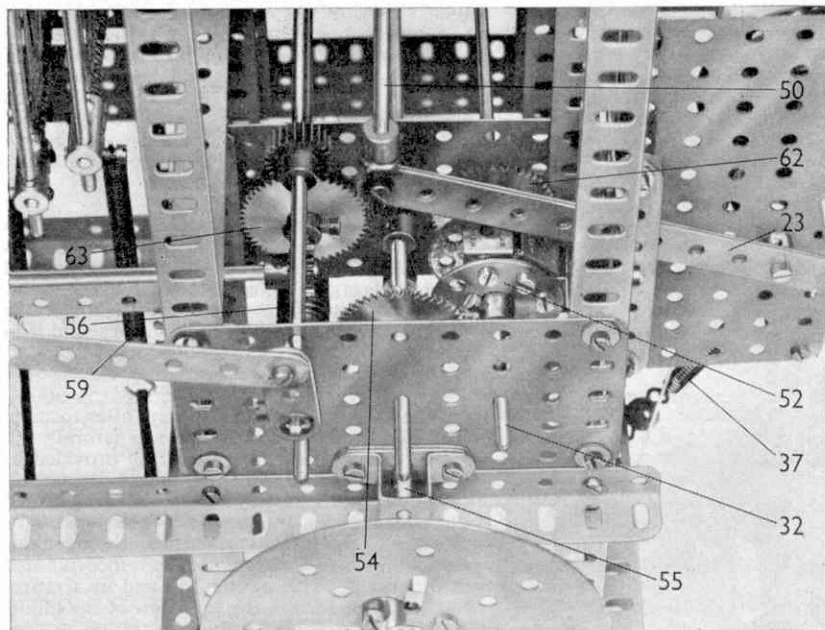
The gearing and "picking stick" cams at one side of the Loom.
